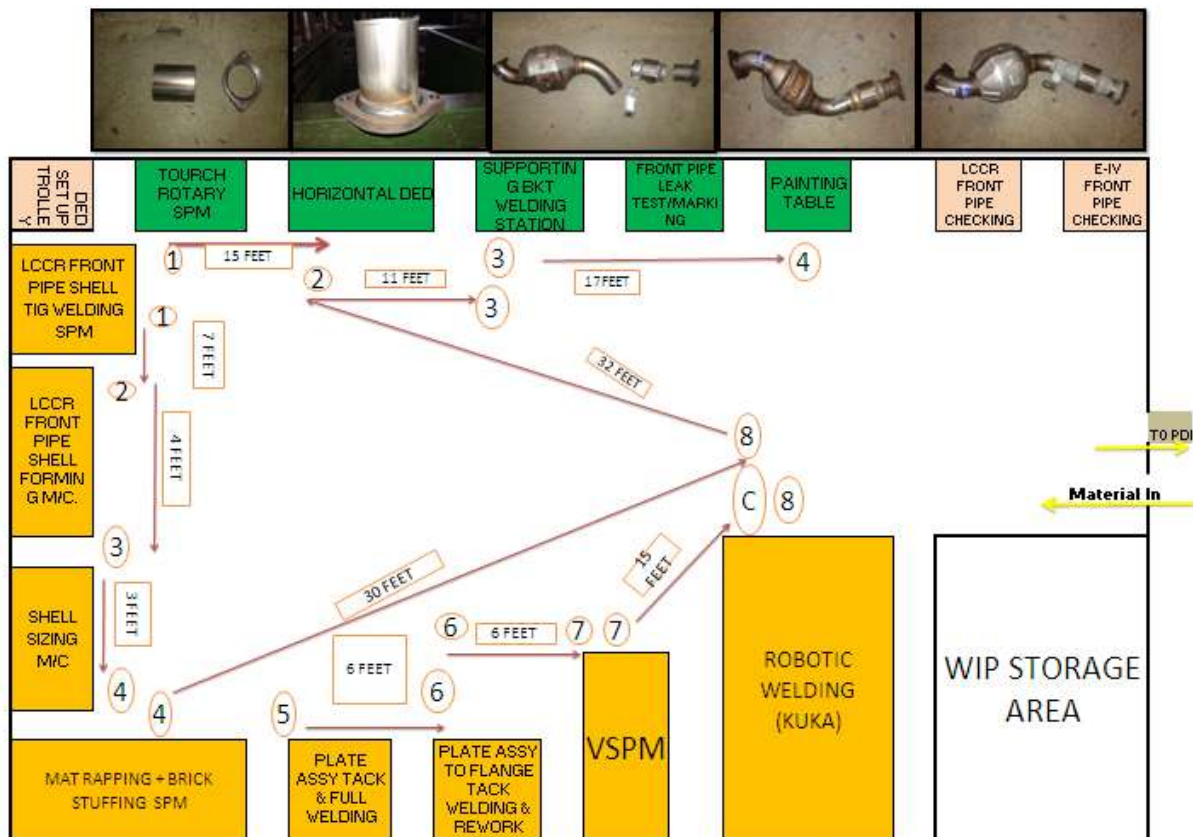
Scorpio W105 MHAWK Front Pipe Assembly Layout
